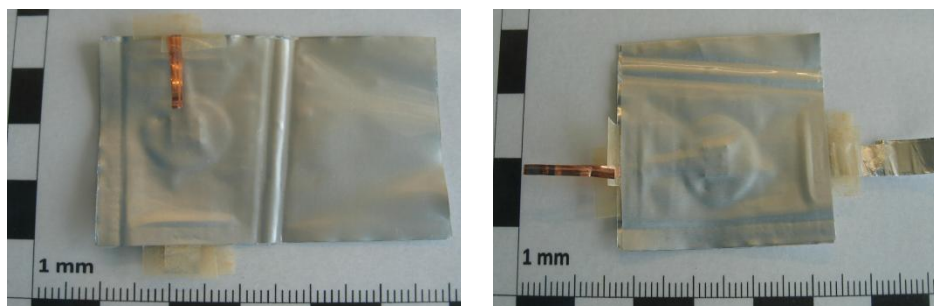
Images of the finished pouch cell. Left: Cell after welding under reduced pressure with clearly visible weldseam on the right side. Right: Finished pouch cell, with projecting pouch foil cut away.
